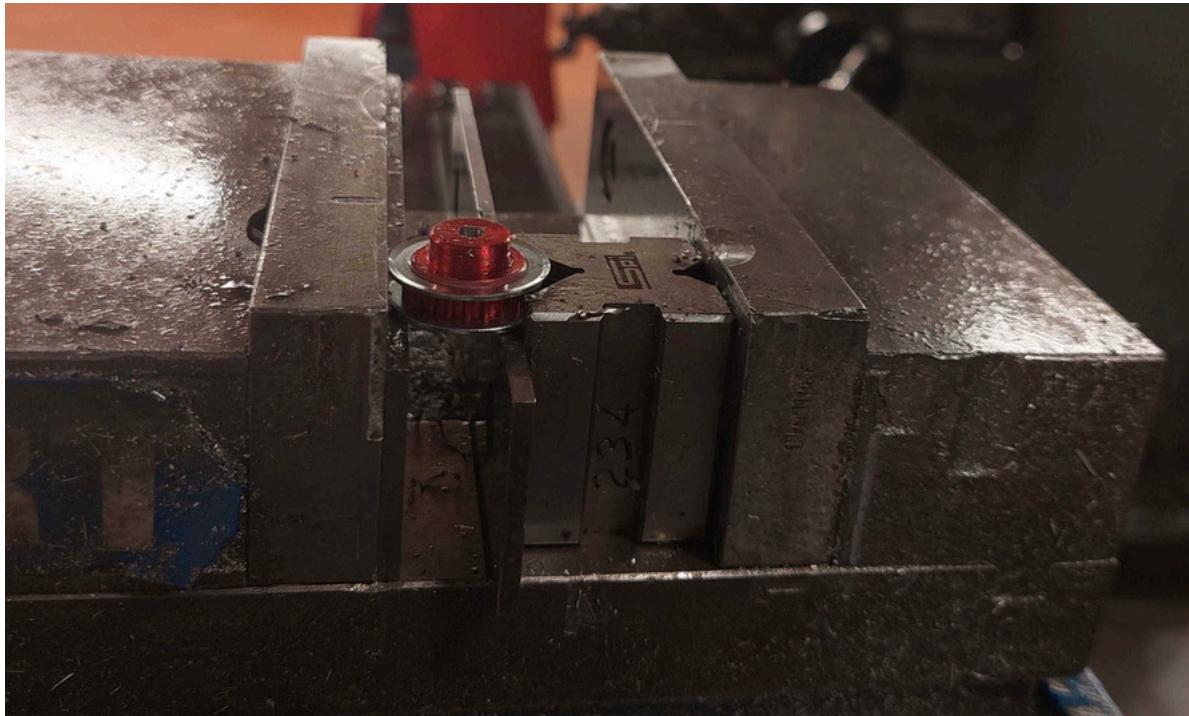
V-block fixture set up used to machine the pulleys. Use the wiggler to find the edges of the circle, matching with nominal dimensions. Use the mill's digital display buttons to then find the center. Repeat on both x and y-axes.
